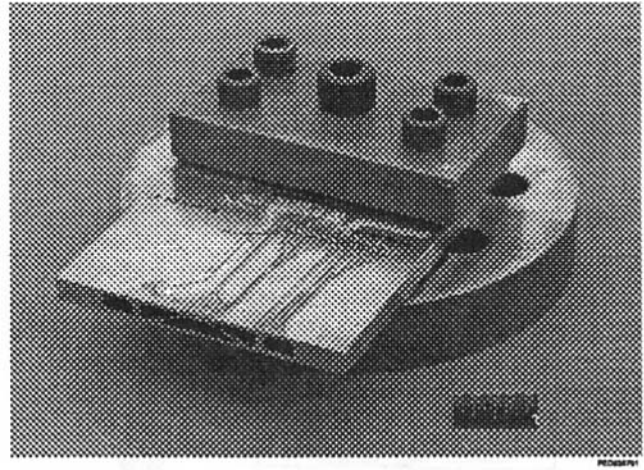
Specimen PW10 instrumented and mounted between fixture plates
